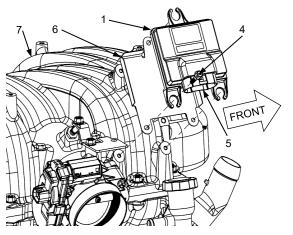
TSM (1), TSM Electrical Connector location (5), TSM Mounting Bolt (4), TSM Mounting Bracket (6), Upper Intake Manifold (7)
